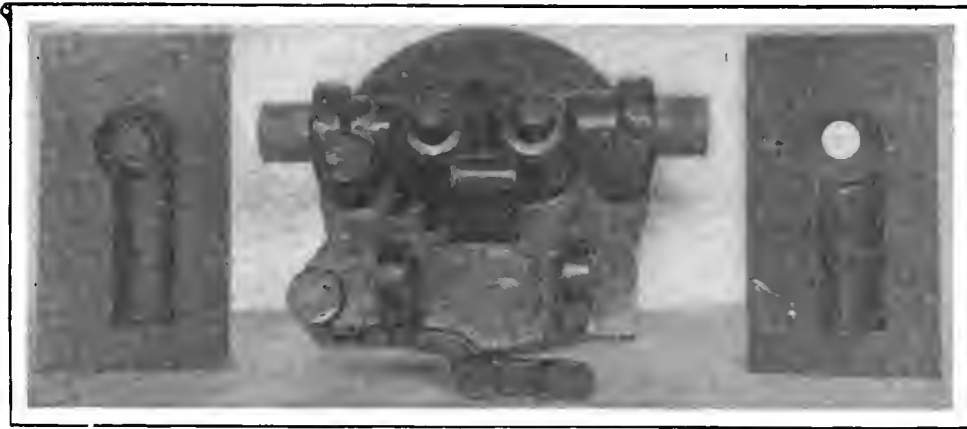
Pattern of cylinder head and core boxes for valve cages used in making the change
